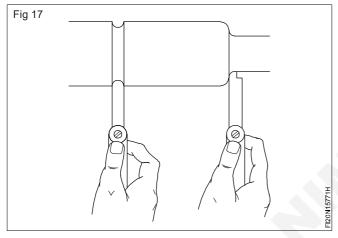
shows the application of radius gauge to check the radius formed externally. Fig 17 shows the application of a fillet gauge to check the fillet formed on a turned component. The other typical applications are:
